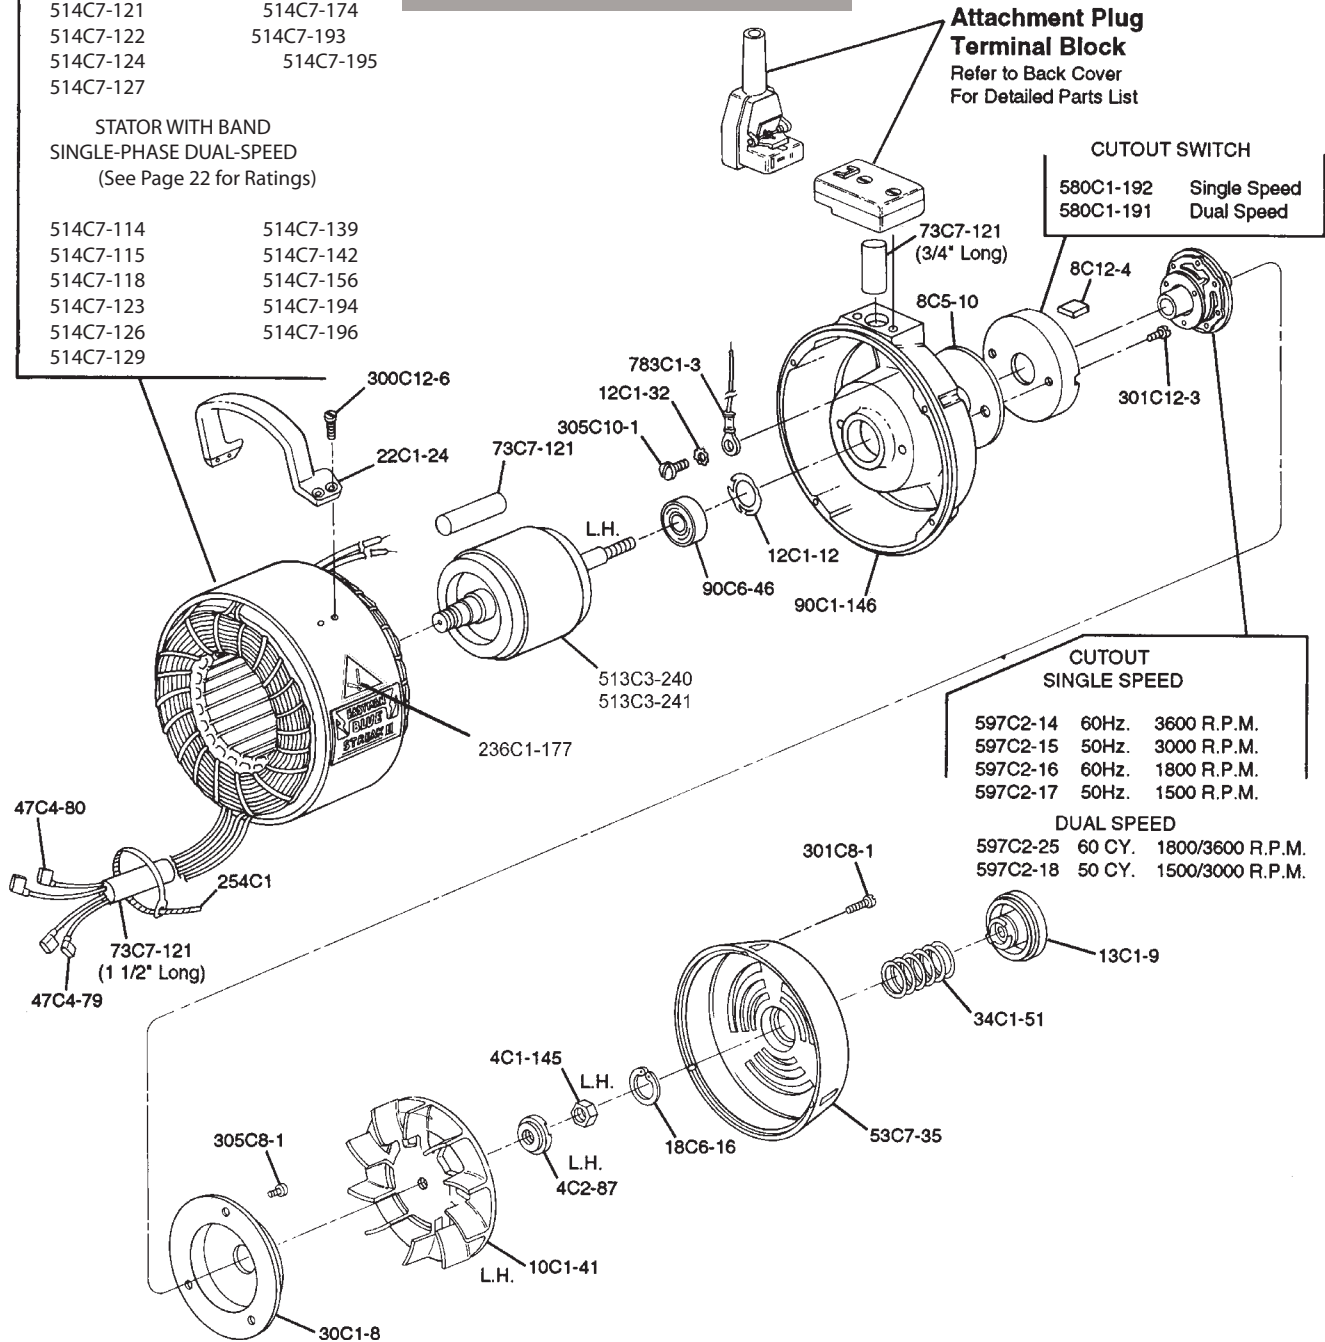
Single/Dual-Phase Motor Assembly (Exploded View)
